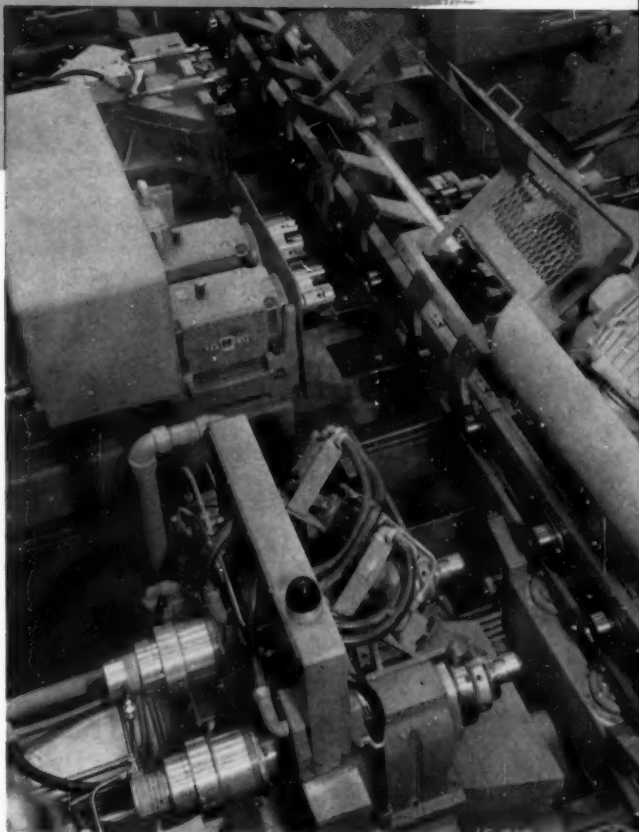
Typical machine tool automation. Part is drum and sleeve assembly of cast iron. Operations are drilling, boring turning, facing, grooving and chamfering, with conventional bar type transfer.
